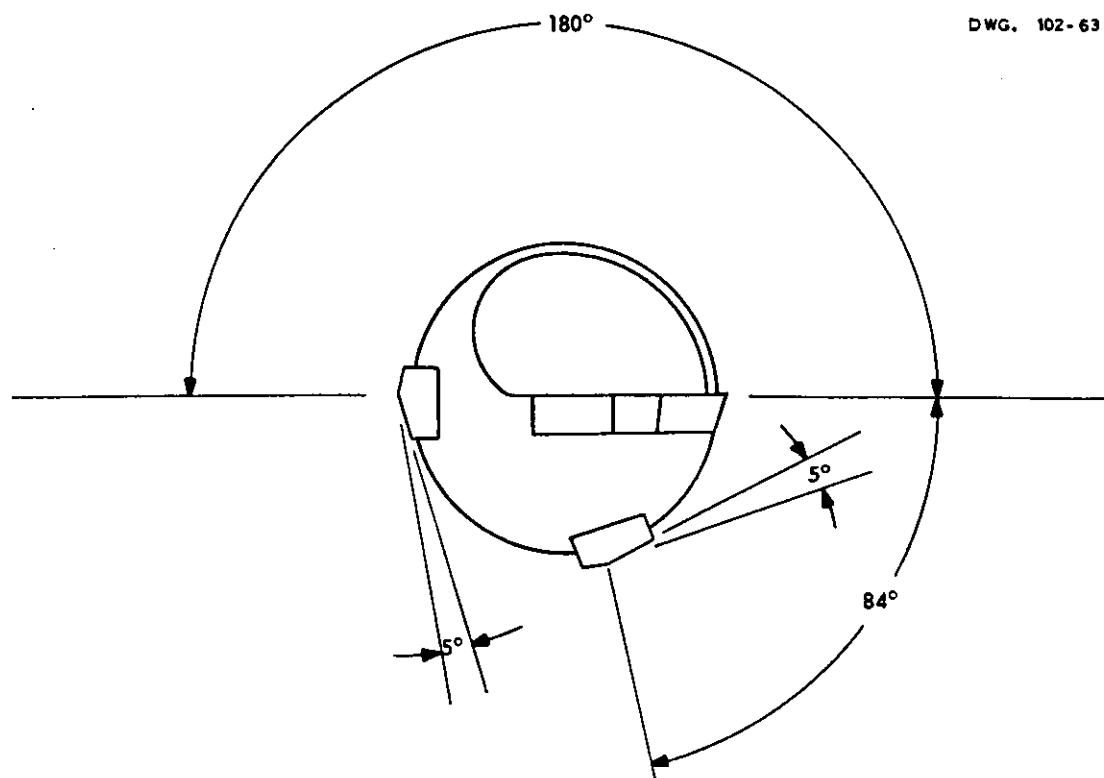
Solid Boring Tool, 5° Relief on Pressure Pads
